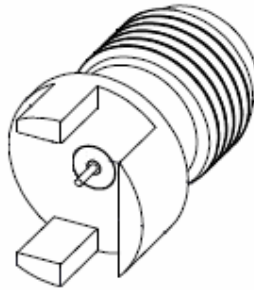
SRI Connector Gage, SMA Female PCB Mount, 21-146-1000-01
